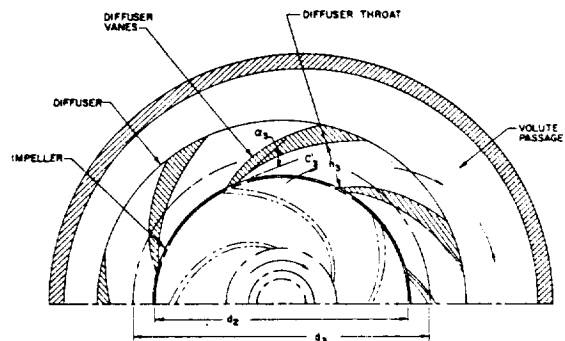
Typical layout of the diffuser for a centrifugal pump volute casing.
